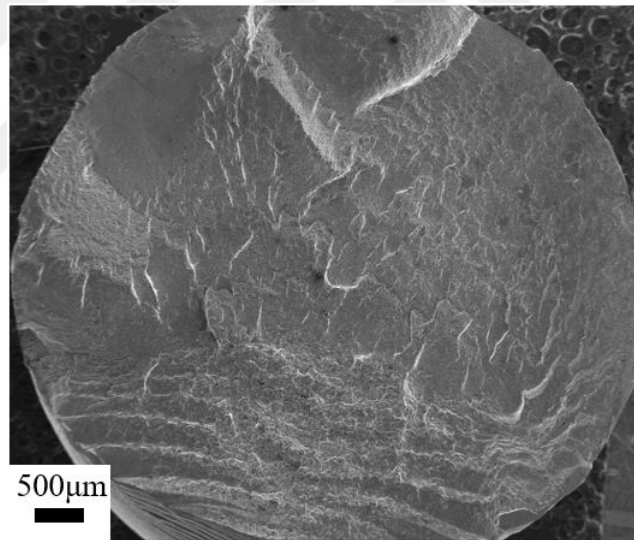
General view of the fatigue fracture surface of unburnished DSS sample broken in 5.282.618 cycles at 75% of σ_{yield}
